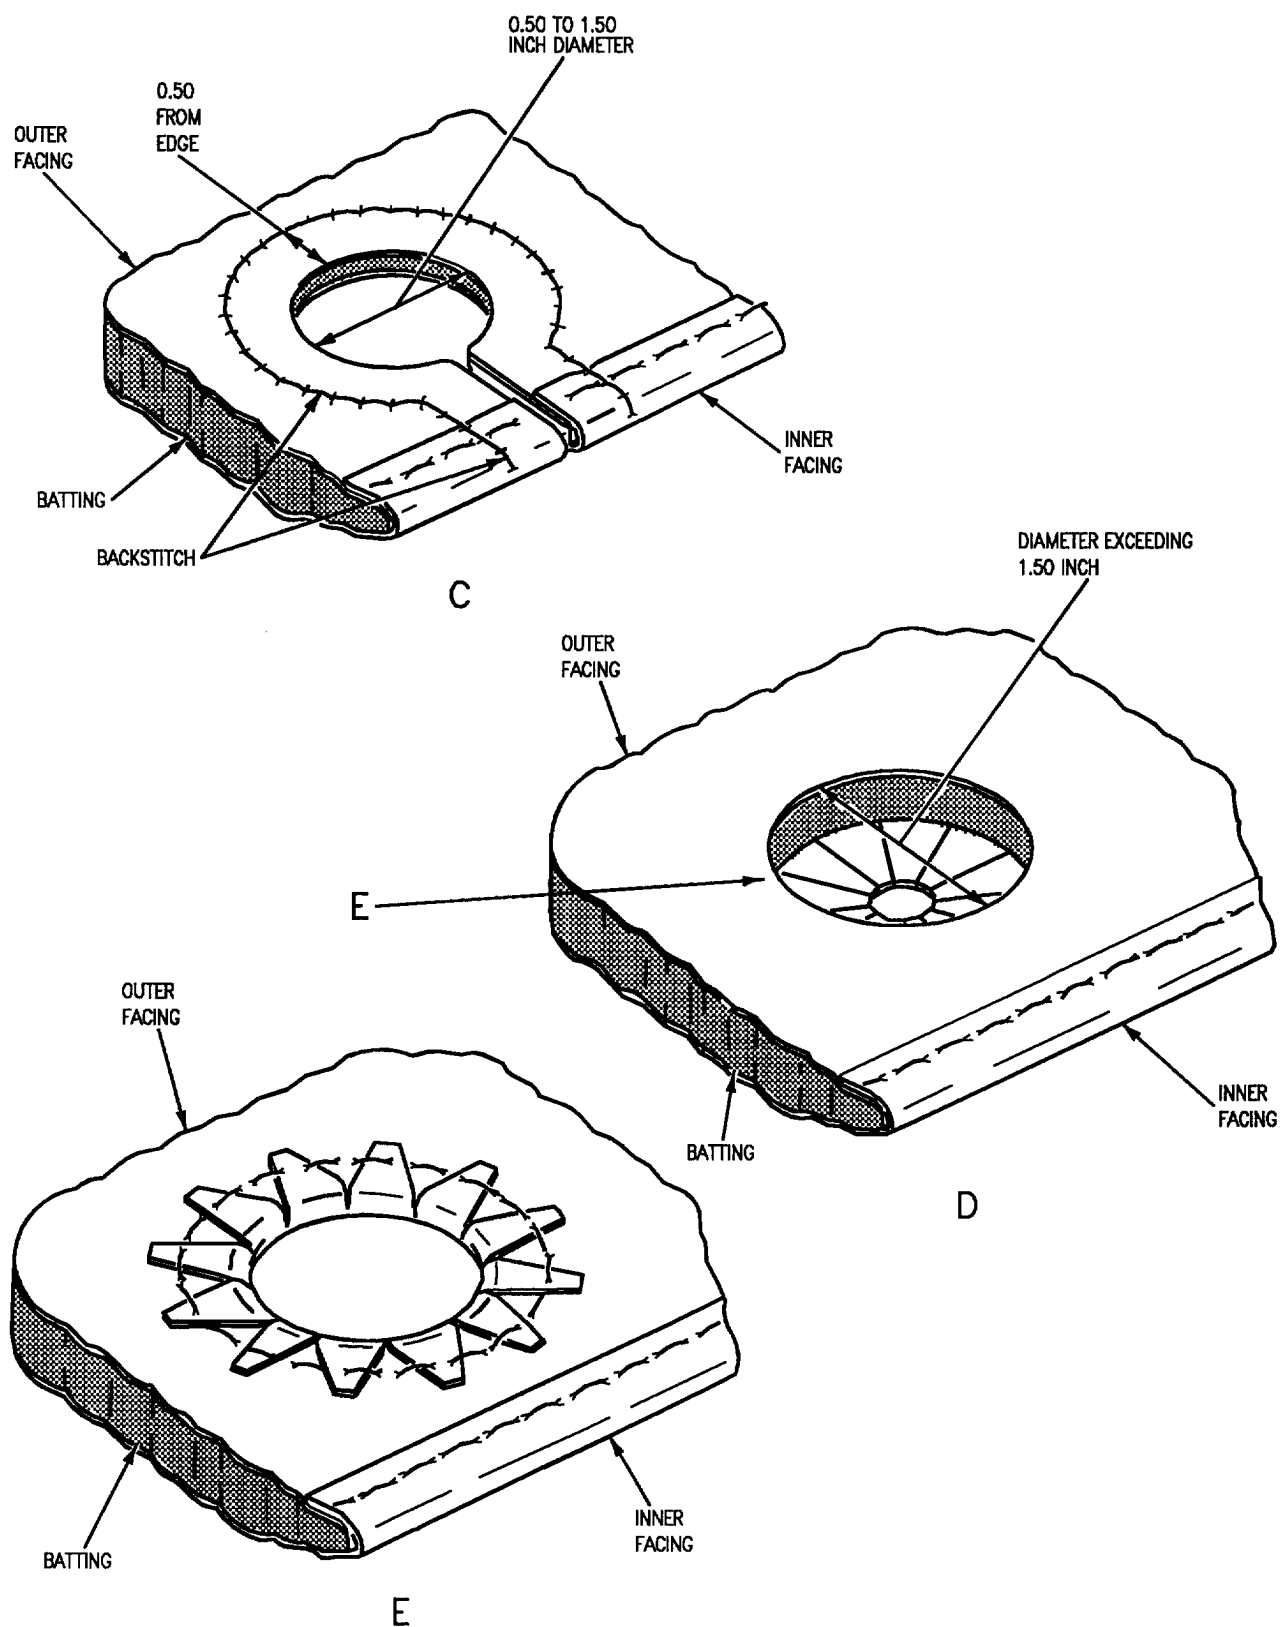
74A800664 Blanket Replacement (Sheet 1)
